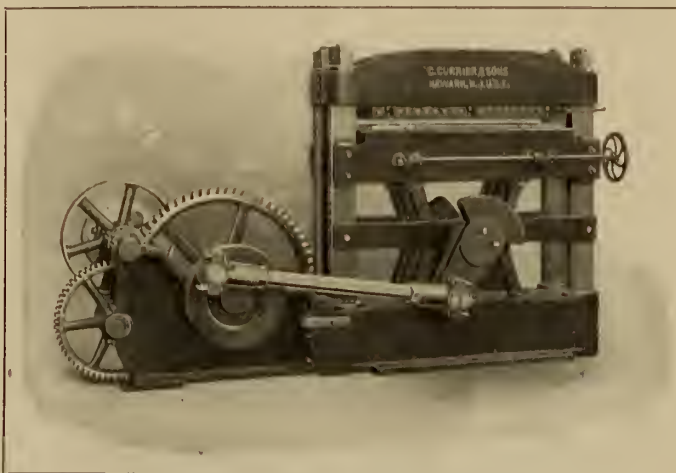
EMBOSING PRESS SOMETIMES USED IN PLACE OF THE ROLL MACHINES
